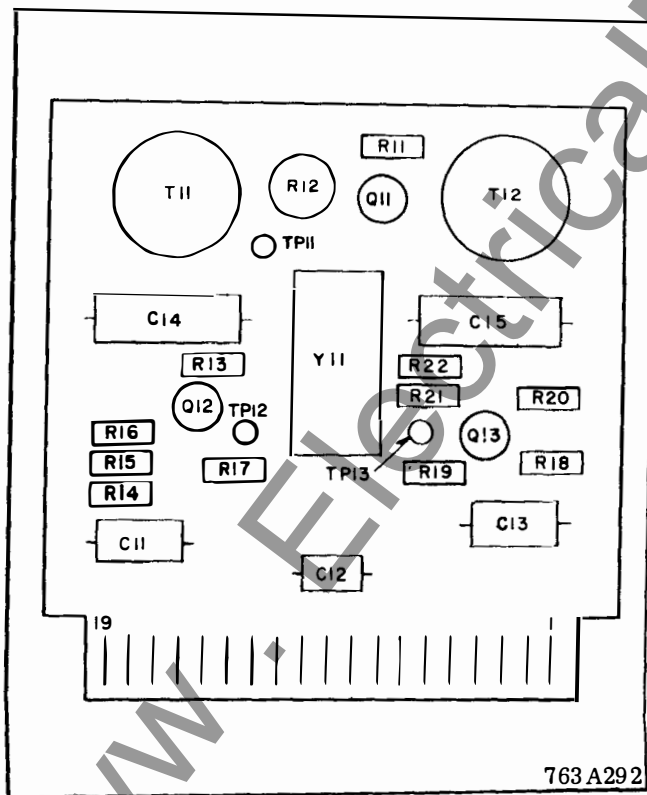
Component locations on oscillator and mixer printed circuit board.
